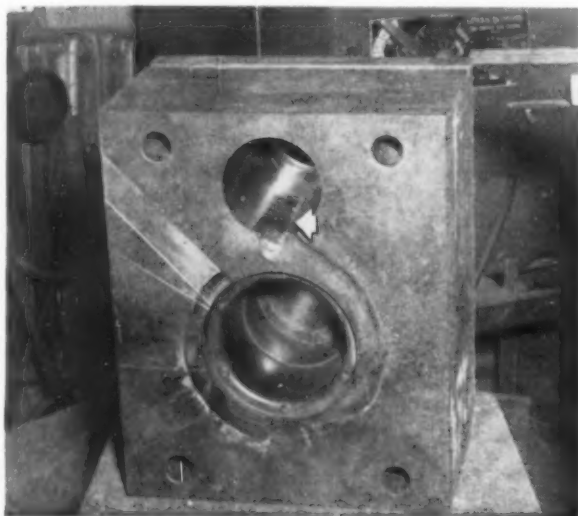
On larger pieces, such as this water-cooled die casting die, a composite welding procedure is used.
